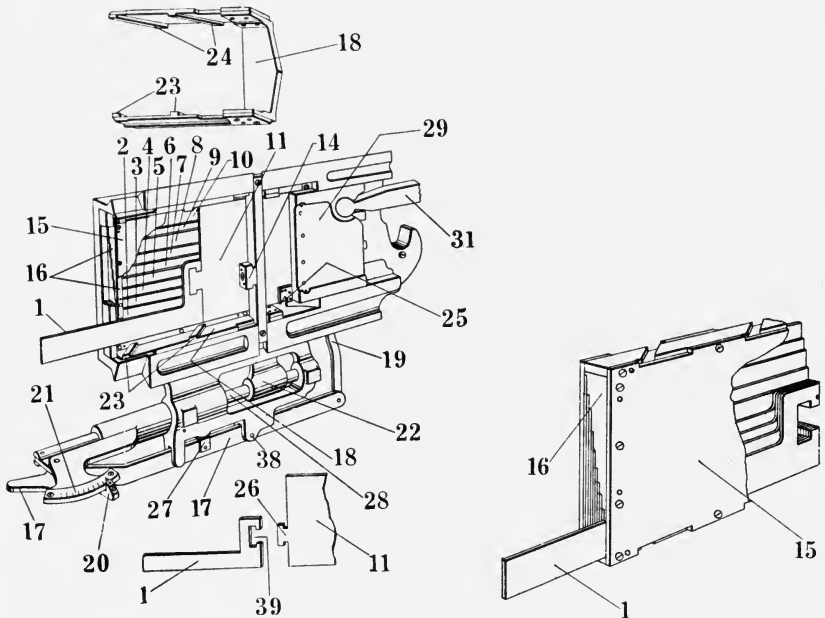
The Intertype Universal Ejector Blade Magazine is contained within the mold slide. The magazine 15 houses any selection of ten solid ejector blades. The operator can instantly change from one blade to another by depressing the locating lever 17, and moving the indicator 20 to the number on the scale 21 which corresponds with the length of ejector blade desired.
